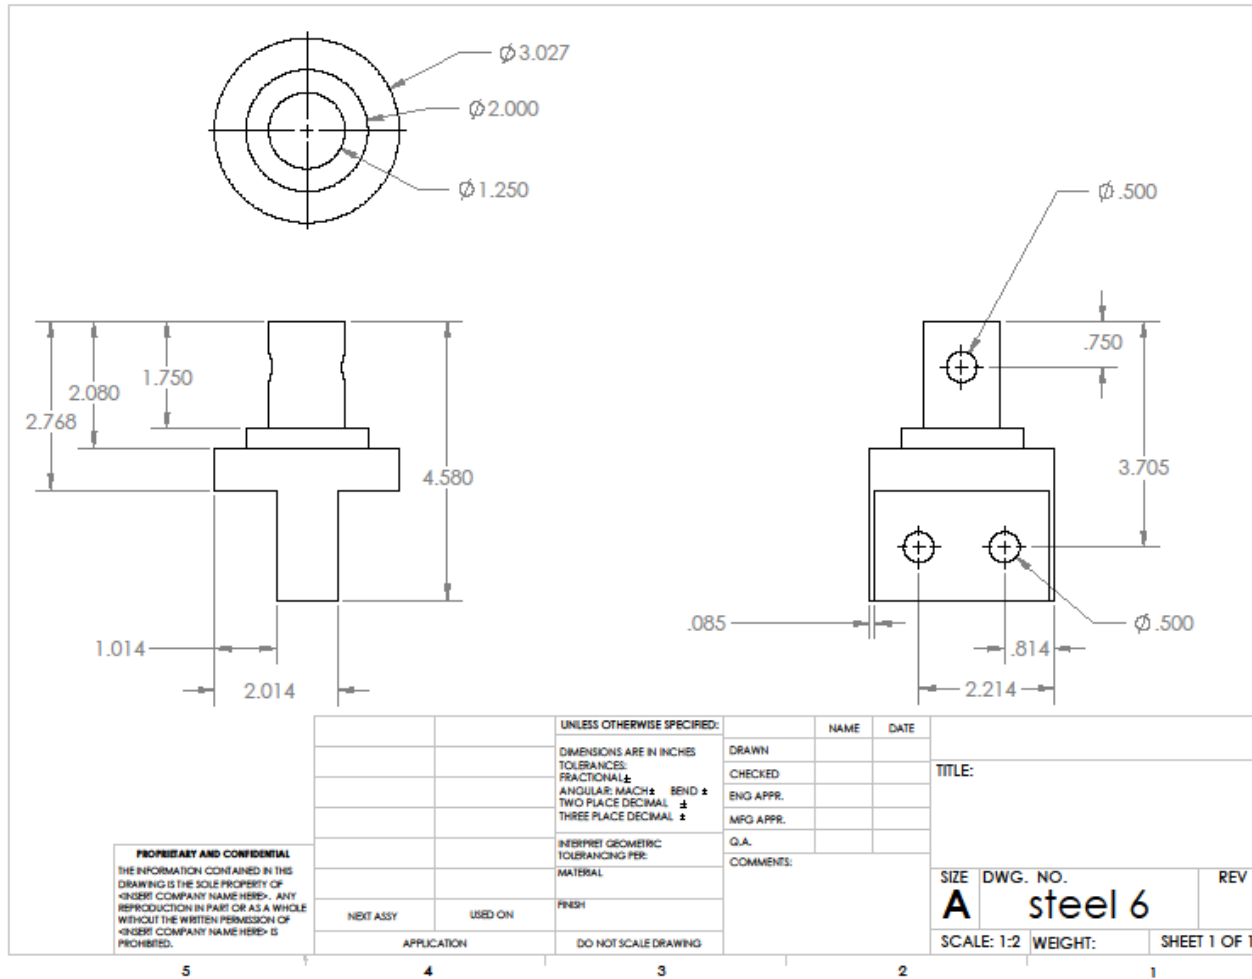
Technical drawing of the 303 stainless steel adapter. All dimensions in inches.
